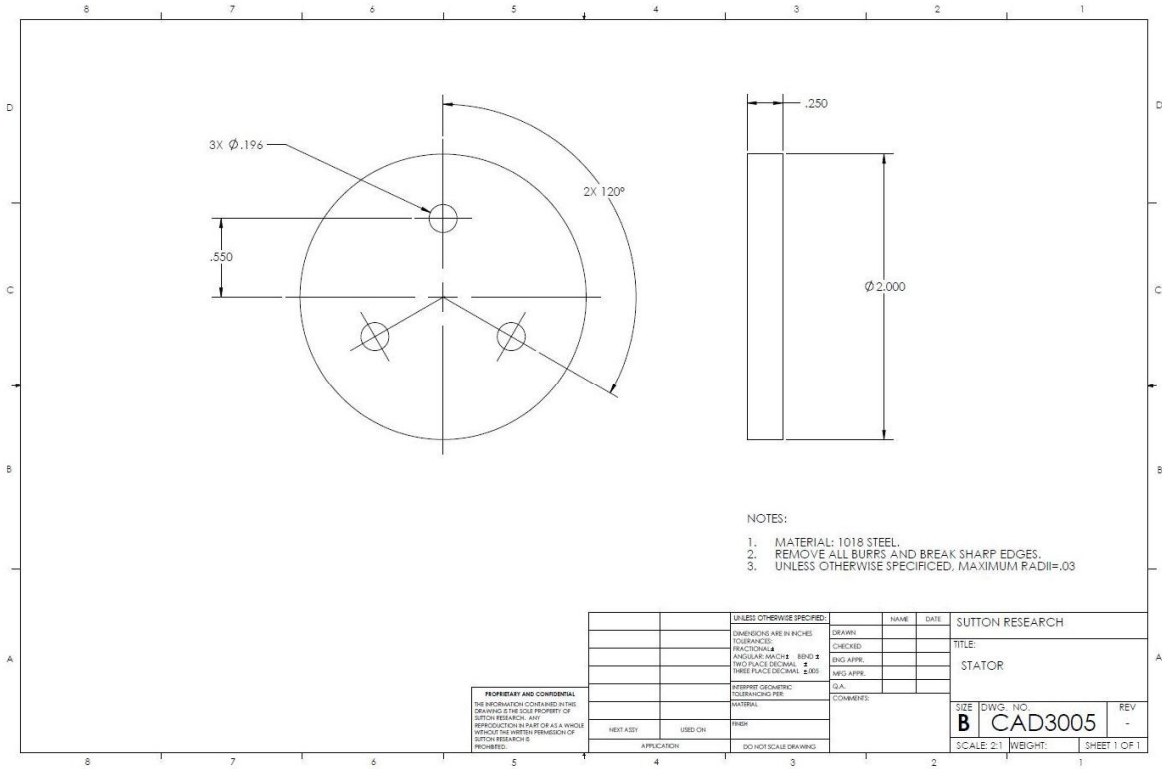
Stator Drawing. This figure details the stator for the permanent magnet machine built and tested for experiments 3 and 4.
